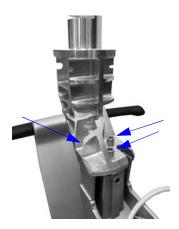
Unscrew three screws and remove the LCD Arm Riser
